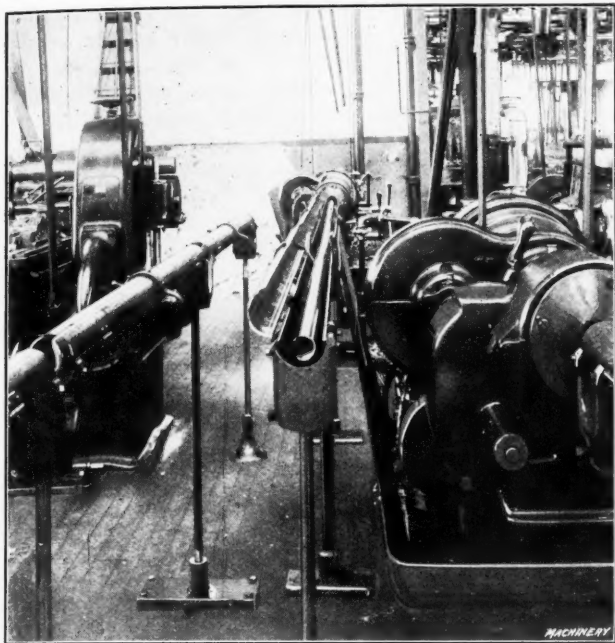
Bar Stock Guard for Turret Lathes with the Pipe Open
